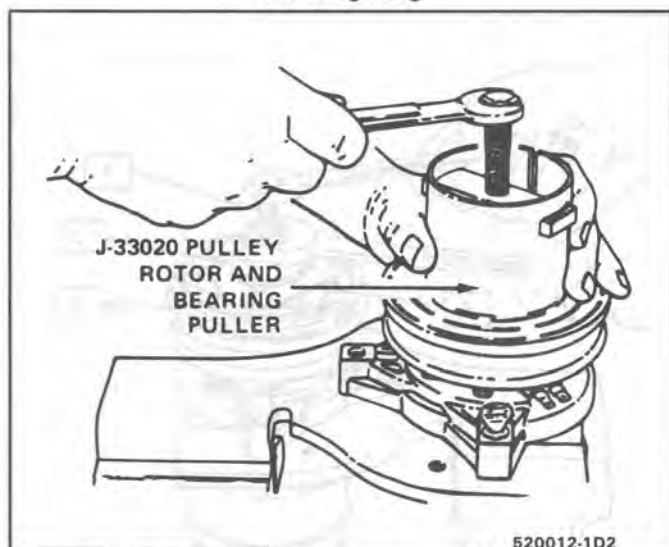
Removing Pulley Rotor and Bearing Assembly
